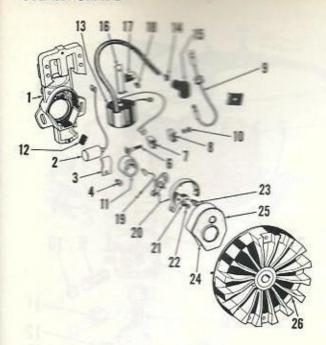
Exploded view of magneto with adjustable ignition timing as used on some later models. Refer to Fig. SK12 for view of magneto and backing plate showing timing marks.
